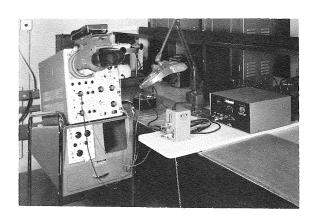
Welding Equipment Facility for Miniature Module Construction
